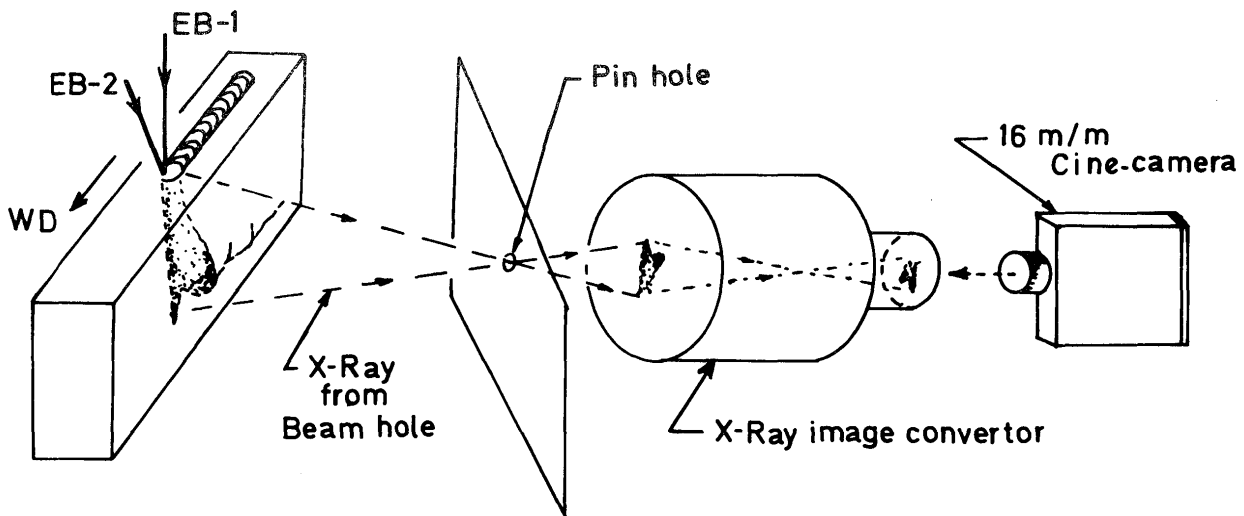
Beam hole X-Ray observation method for beam hole behavior during welding.
